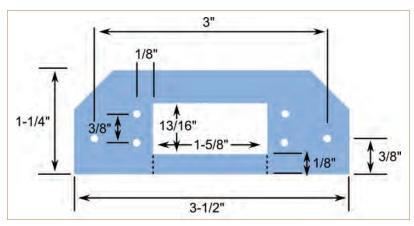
Layout pattern for cutting and drilling the servo mount. You'll need two of these. If cutting the inside rectangle proves difficult, you can instead make the mounts by cutting through at the dotted line. The mount will be a little more fragile, so handle it carefully. Use all four screws to secure the servo in the mount, rather than just two.
